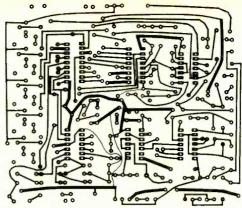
FOIL PATTERN of bottom-side of PC board shown half size.
